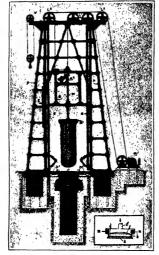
and Fig. 2 (insert).—Sievert's window glass blowing machine.
